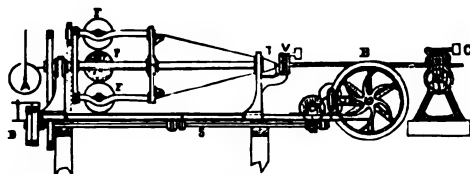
Wire rope: A, heart; B, draw-off drum; C, friction-drum; D, driving-pulley; F, bobbins; T, top; V, tube; S, driving-shaft.
